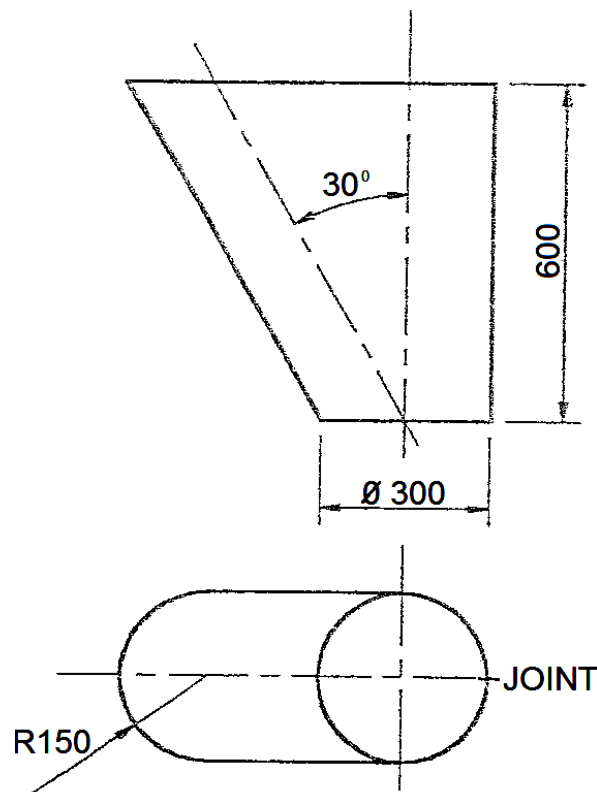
A front view and a top view of an oblique cylindrical hopper
